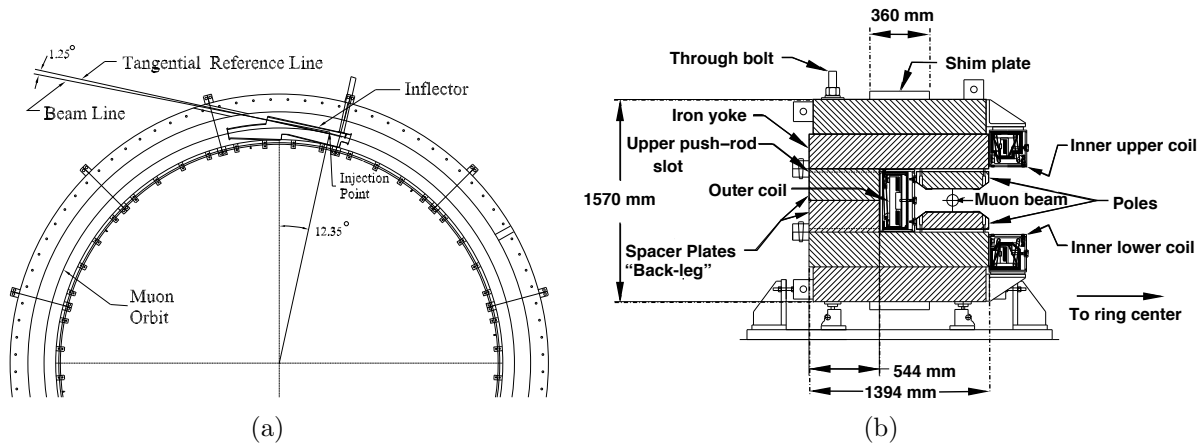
(a) Plan view of the beam entering the storage ring. (b) Elevation view of the storage-ring magnet cross section.
